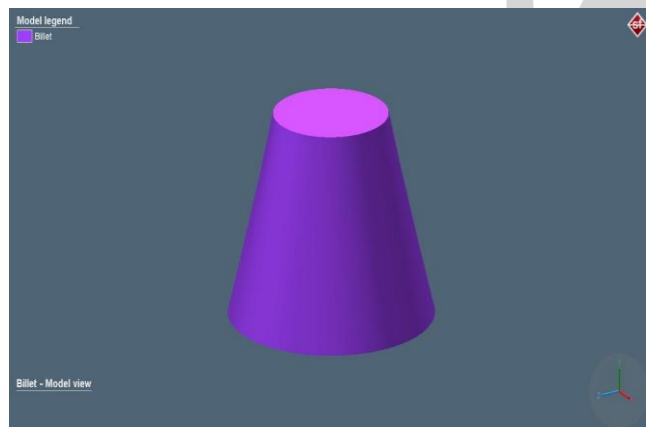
Conical Frustrum Shape Preform with Large Bottom
